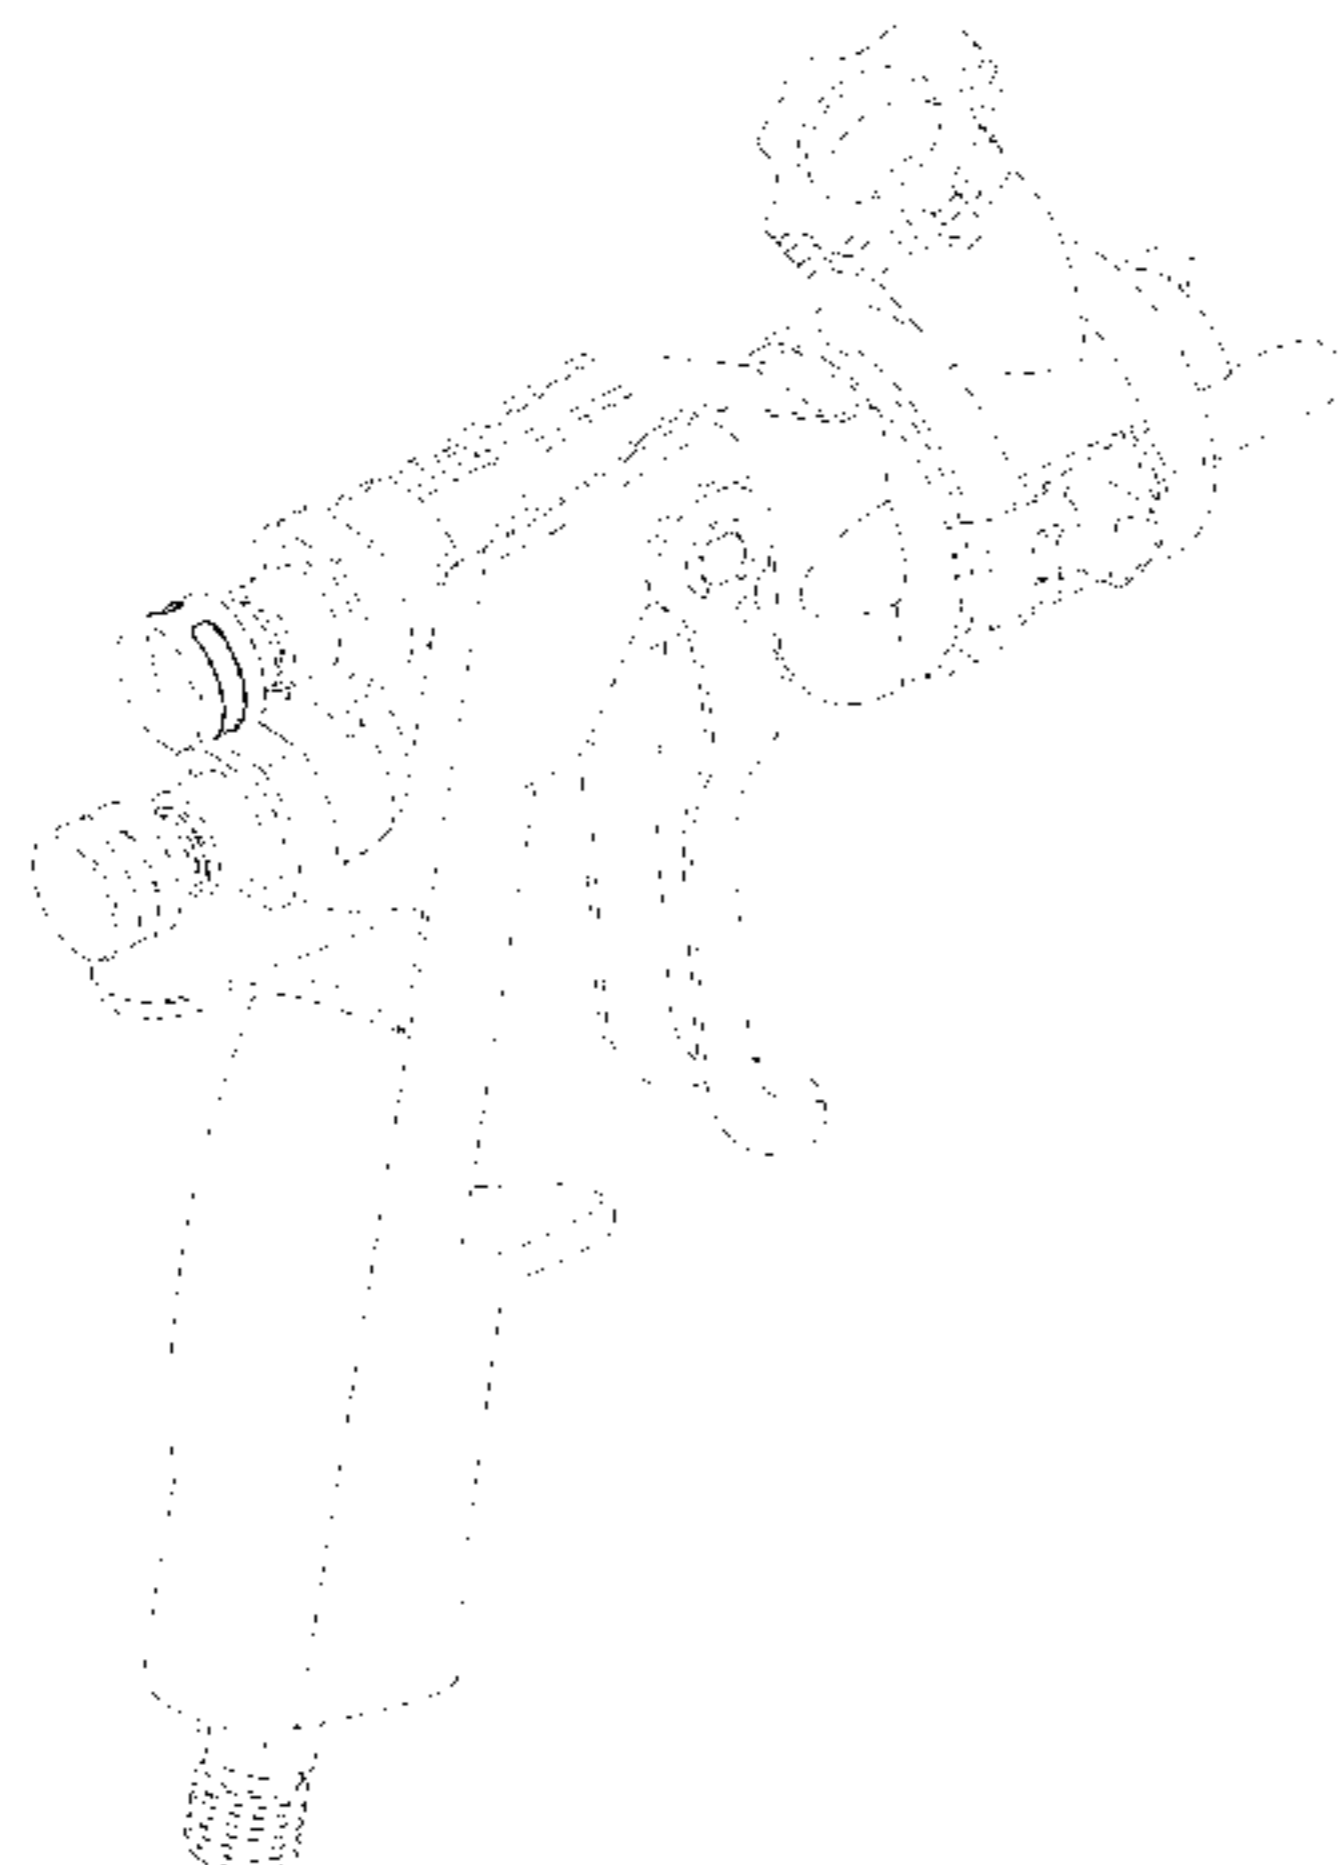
is a front view of a system for identifying spray guns embodying the new design;
